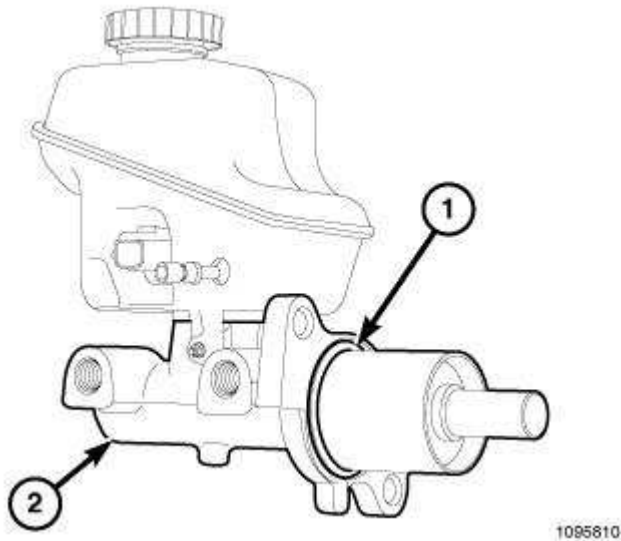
VACUUM SEAL ON REAR OF MASTER CYLINDER
